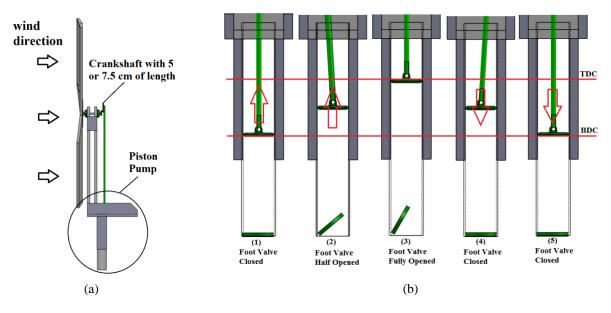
Windpump system (a), Reciprocating pump of salt farmer windmill (b)
